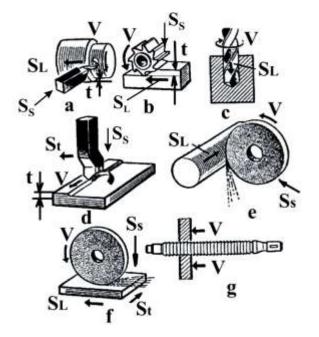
Schemes of the basic machining operations: a – turning; b - milling; c – drilling; d – planning; e, f – grinding; g – broaching
